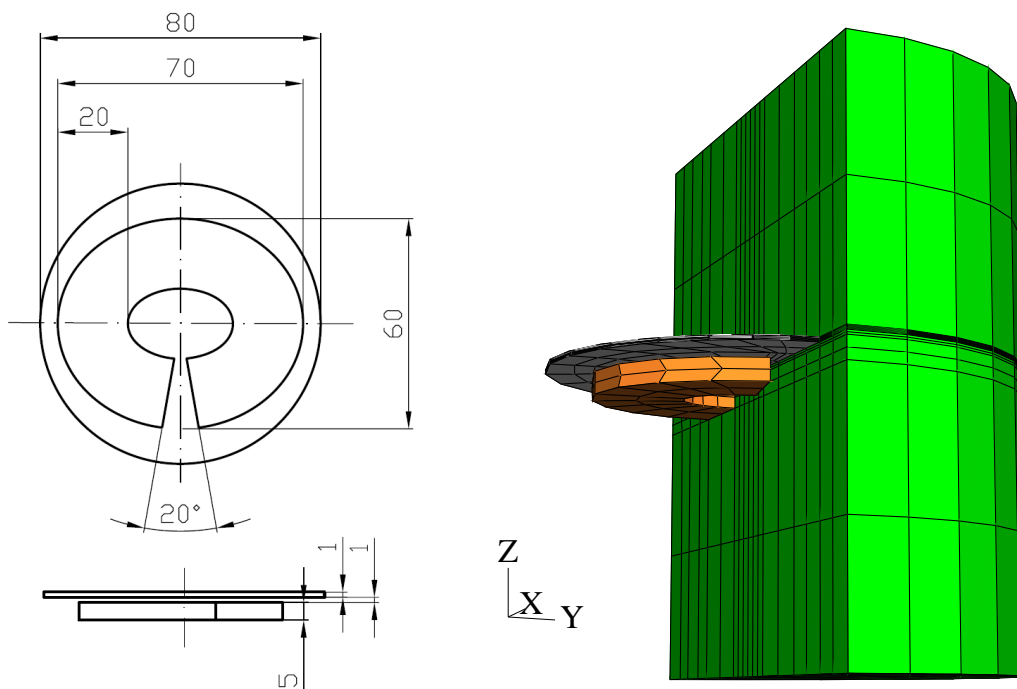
Left: Engineering drawing of the elliptical tool coil and sheet metal. Right: Discretized forming model with illustration of tool coil, sheet metal and surrounding air (only right half of air is displayed).
